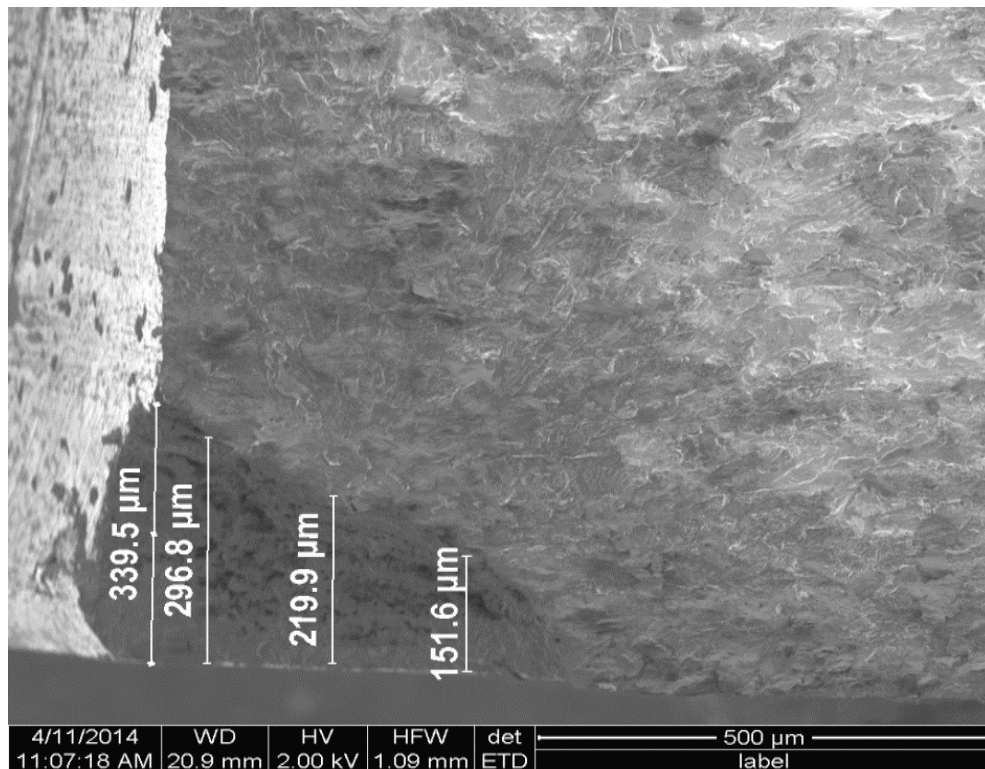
Top view of the corner pit and fracture surface.
